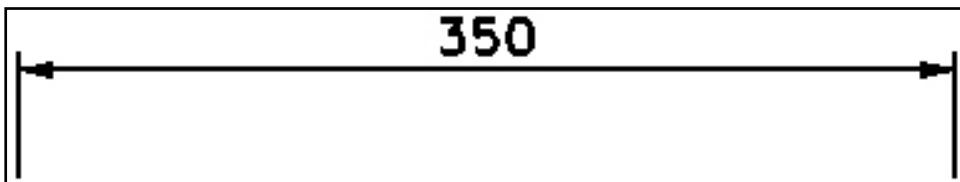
Dimension in millimeters. Always shown as a whole number
